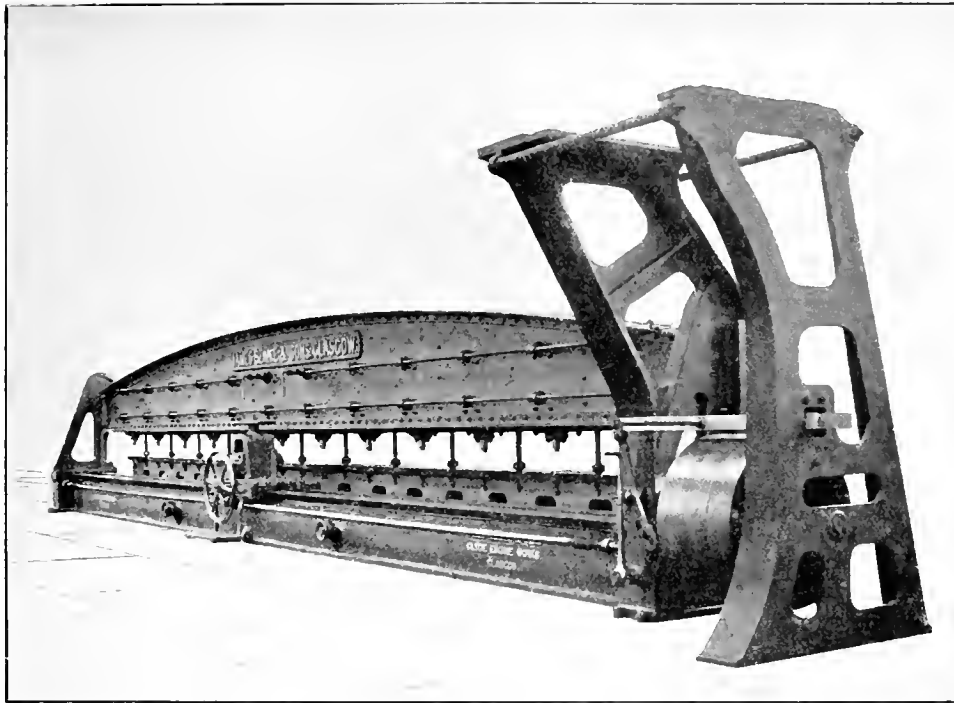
Heavy Plate-edge Planing Machine, by Messrs James Bennie & Sons, Glasgow.
